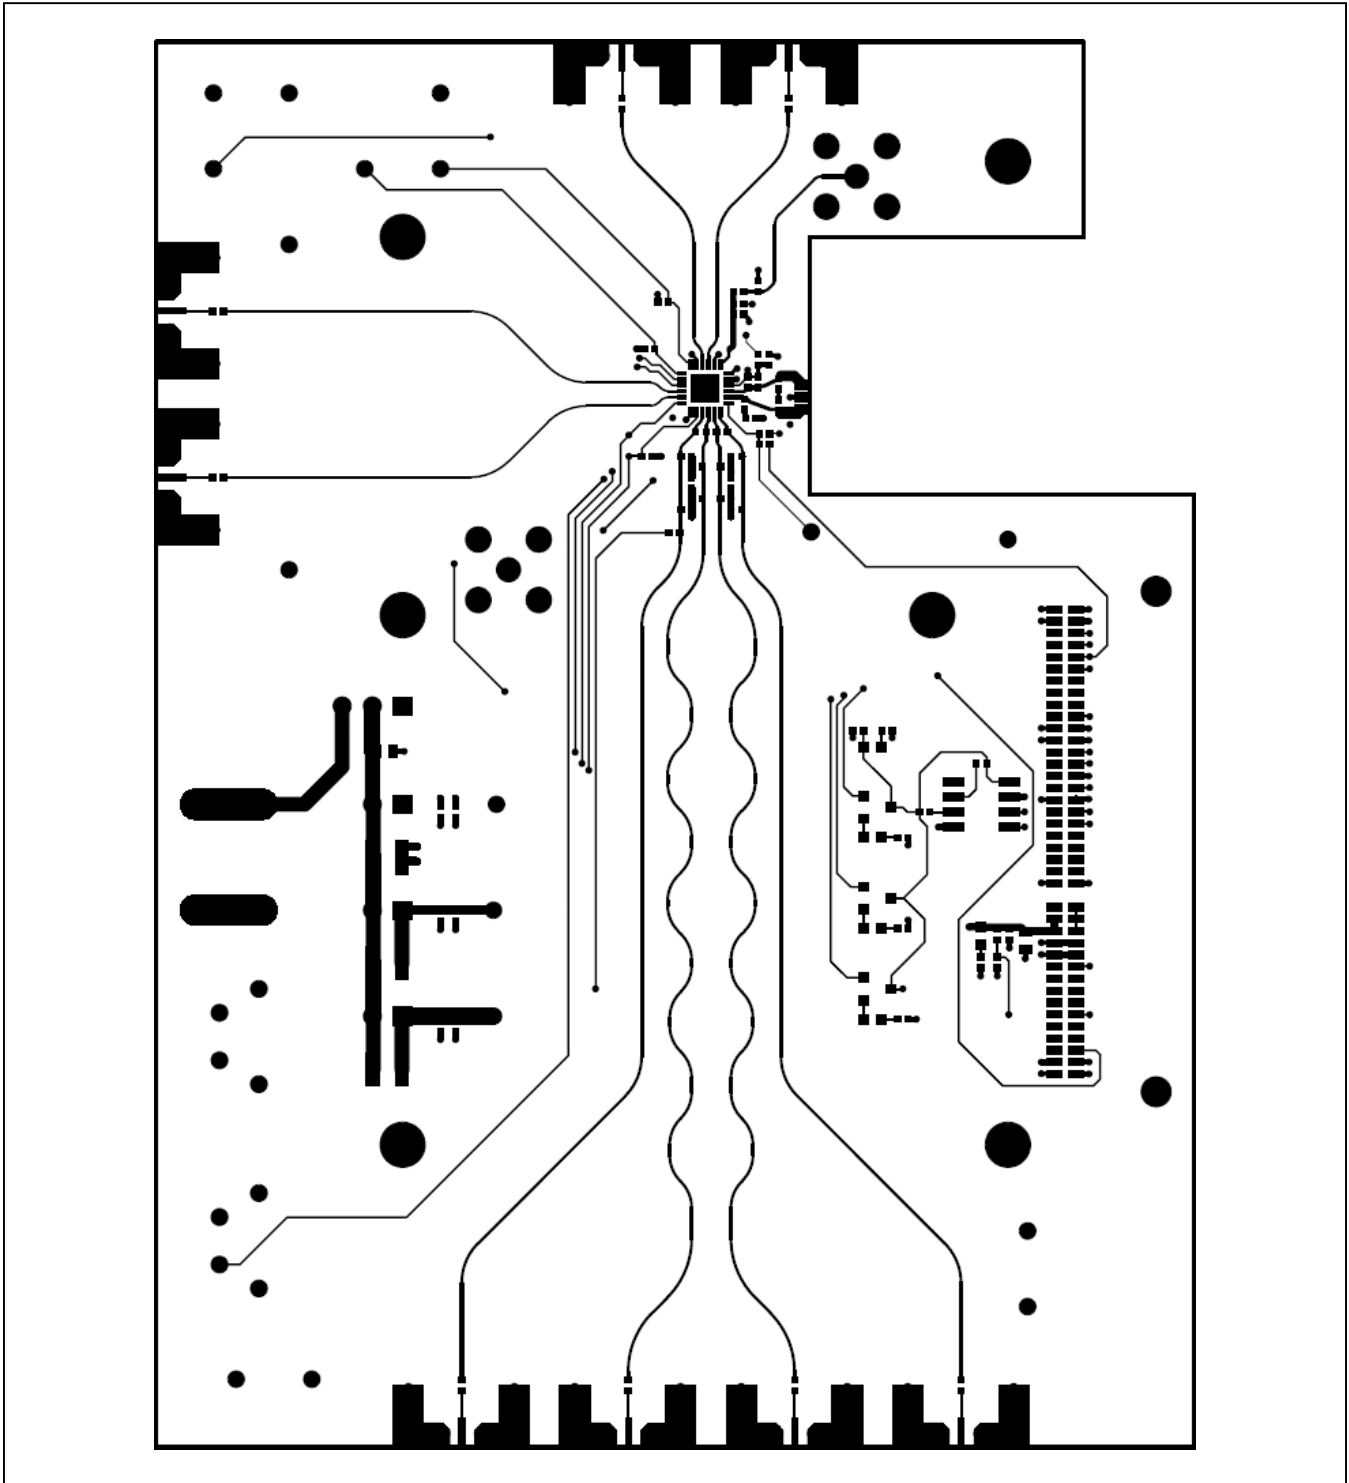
MAX3710 EV Kit PCB Layout—Top Side
